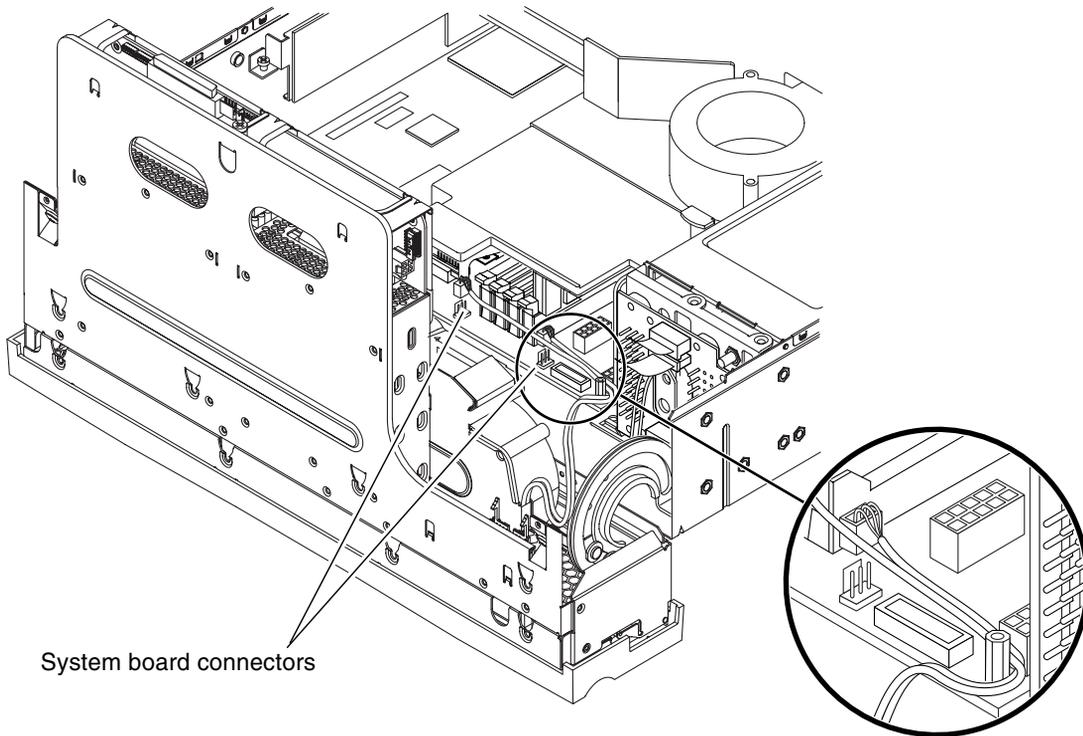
Detaching the Front Fan Assembly Cables From the System Board Connectors
